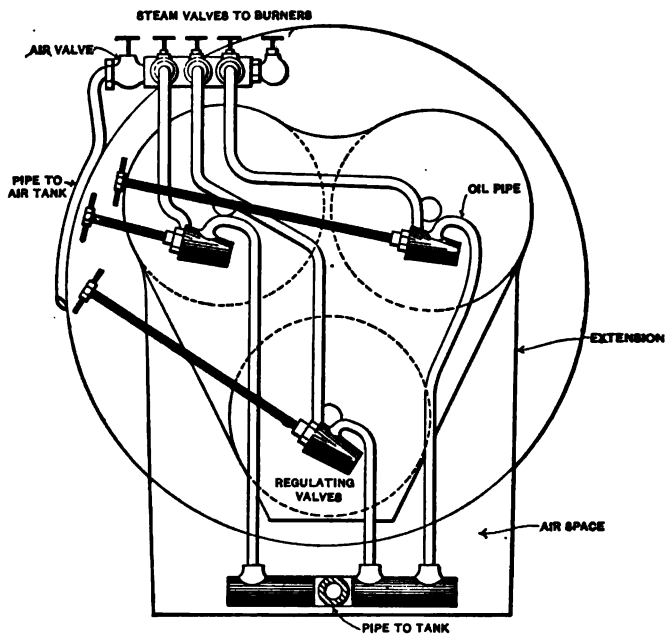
PLAN OF REGULATING VALVES FOR OIL-PIPES AND STEAM-VALVES.
